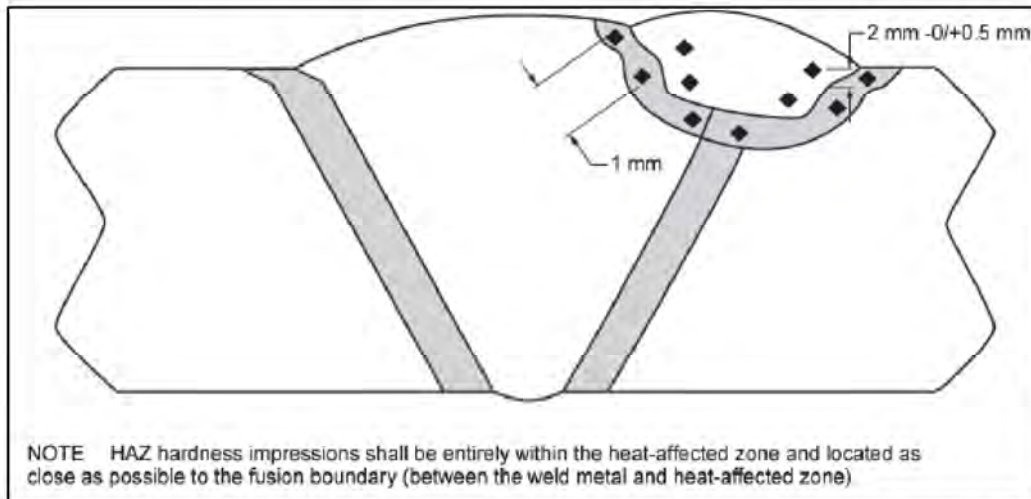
Hardness Indent Locations for a Cover Pass Fusion Line Repair Welding Procedure Qualification for Butt Weld Repairs
